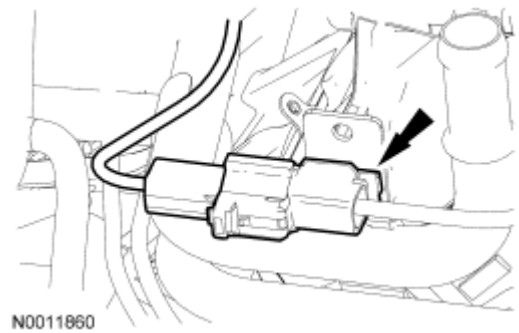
Identifying Cylinder Head Temperature (CHT) Sensor Jumper Harness Electrical Connector
